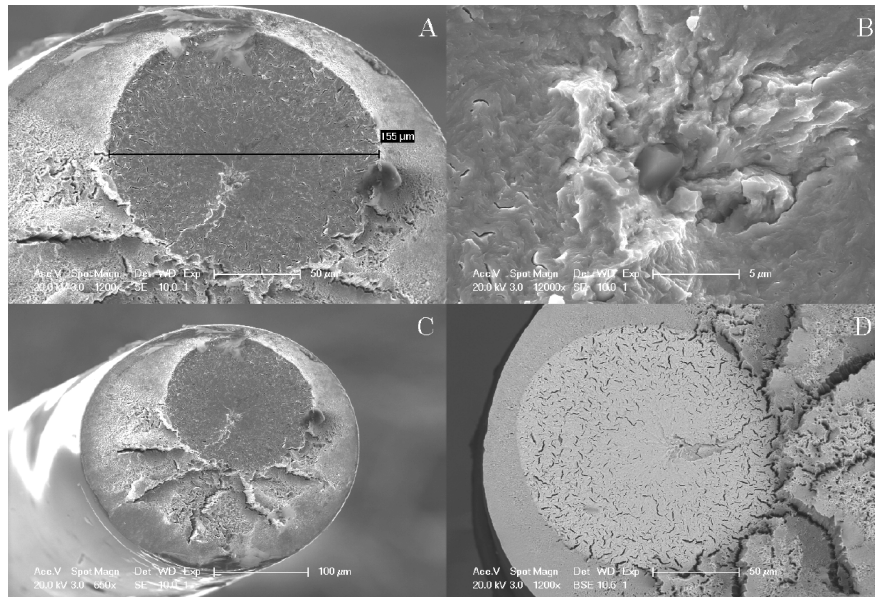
Internal fatigue crack initiation in HCF showing a typical fish eye fracture.
